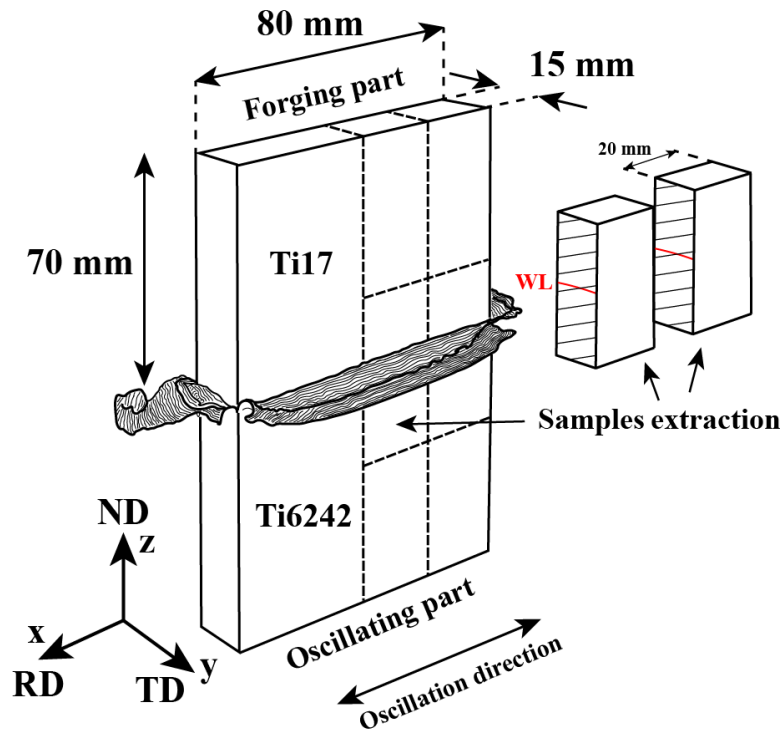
Schematic illustration of a Ti17 – Ti6242 linear friction weld assembly and the sampling strategy.
